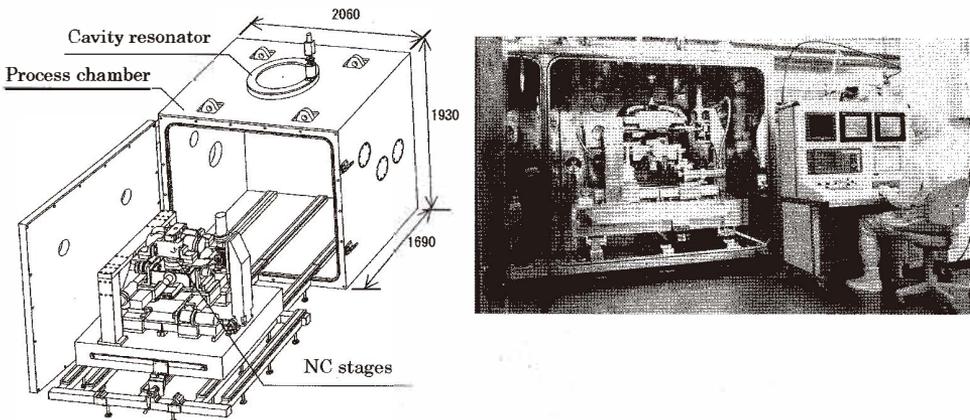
NC P-CVM machine for axi-symmetrical shape.
